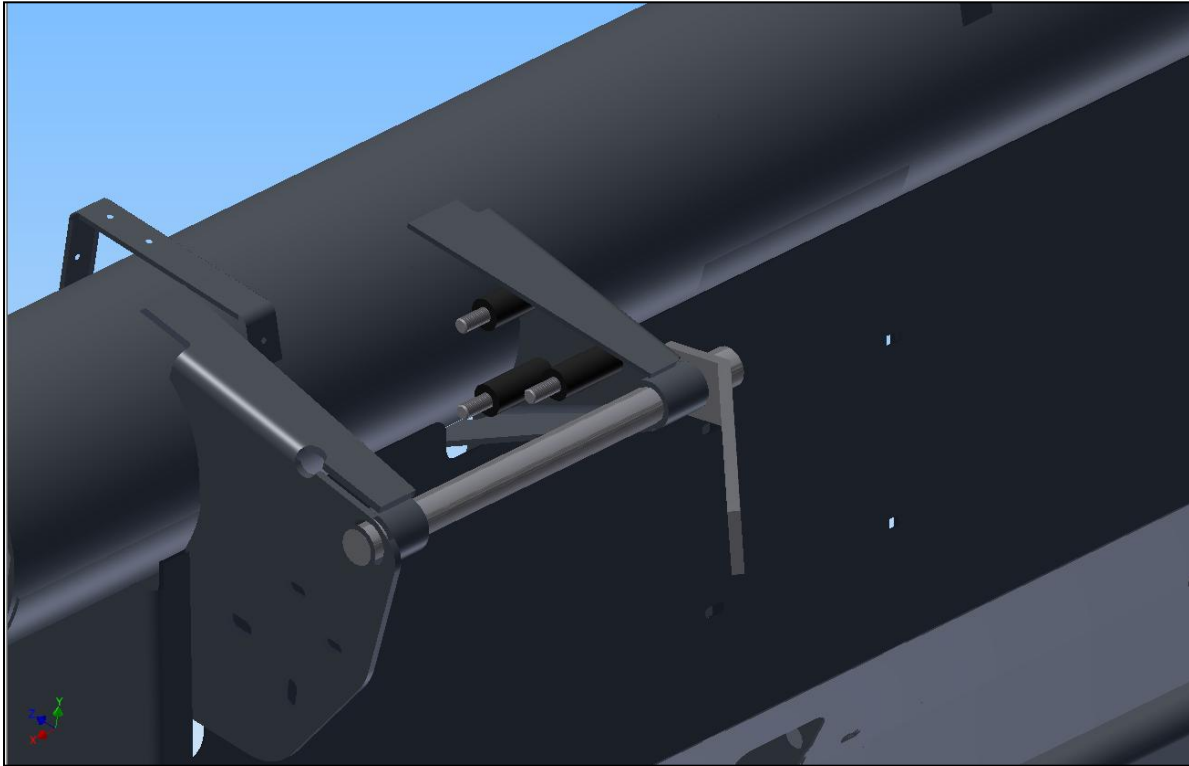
INSTALL BLUE CENTER BEARING MOUNT #408355.
